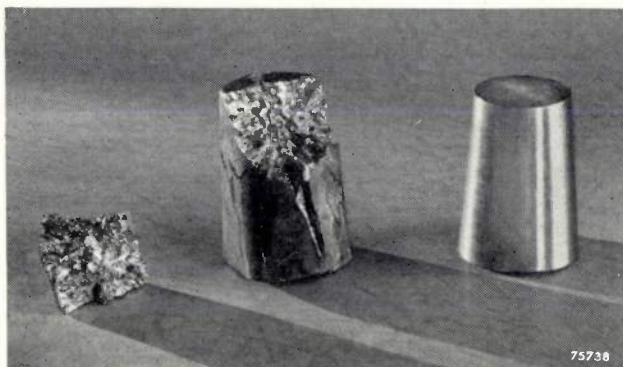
Test specimens of nickel containing 0.02% sulphur, as obtained by solidification in the crucible (i.e. without casting). A specimen of this kind would have to be processed to give it the desired form by forging, rolling, drawing etc., but, owing to the sulphur, the metal was too brittle to permit any deformation. The result of an attempt to forge this material is seen in the specimen at the left of the photograph.
